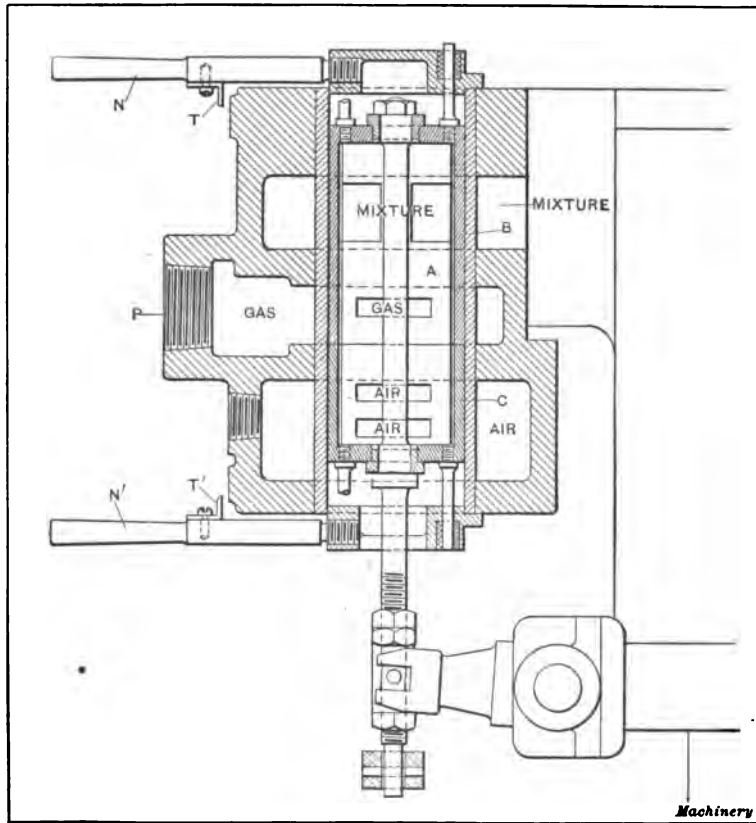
Mixing Valve used on Westinghouse Gas Engine
